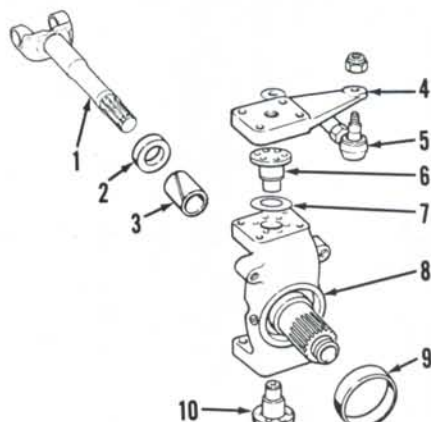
Exploded view of David Brown front drive stub axle showing component parts and their relative positions.
